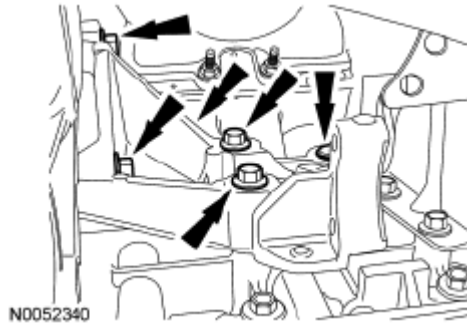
Locating Power Transfer Unit Support Bracket & Bolts
